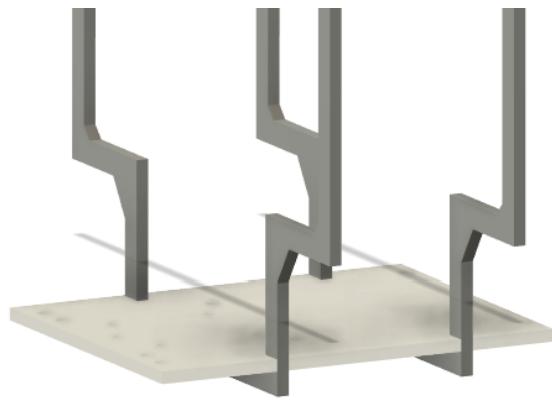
Lower Bottom Plate inserted into the suspension plate.
